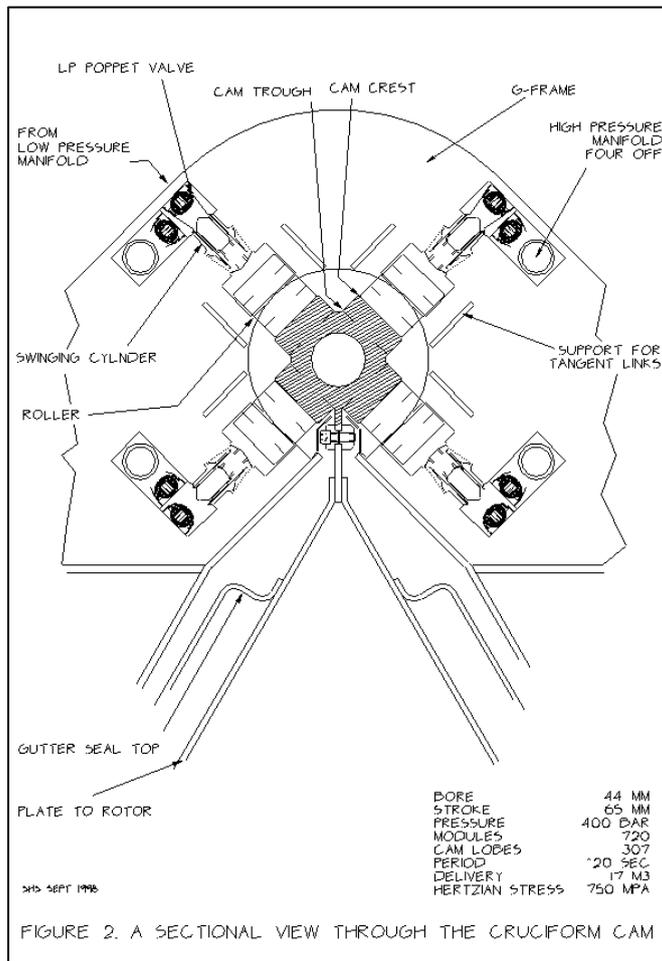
A SECTIONAL VIEW THROUGH THE CRUCIFORM CAM
